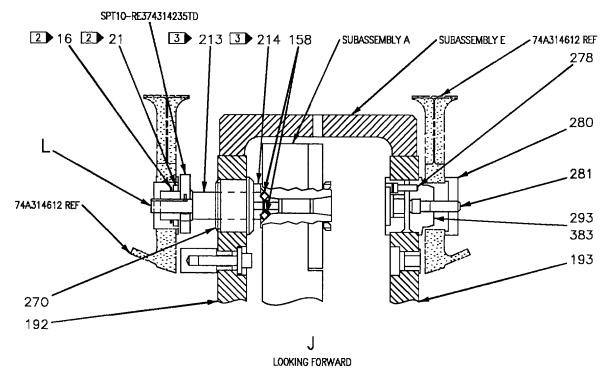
Drag Brace Sleeve Reaming (Sheet 7)
